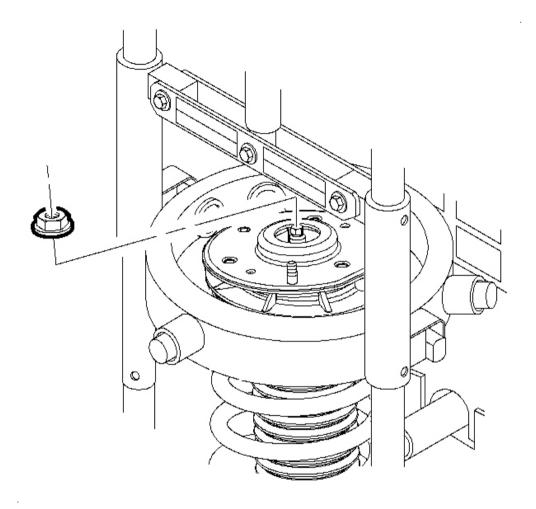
Strut Shaft & Nut Courtesy of GENERAL MOTORS CORP.
